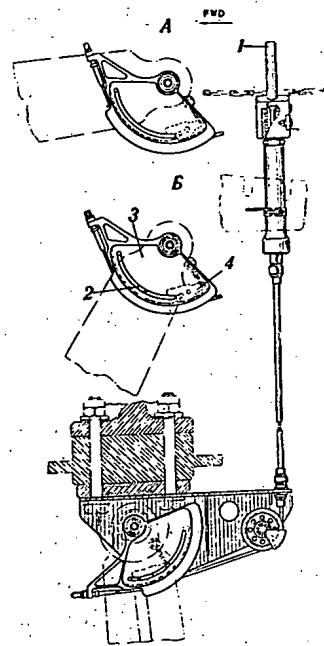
LANDING GEAR MAIN LEG EXTENSION MECHANICAL INDICATOR
